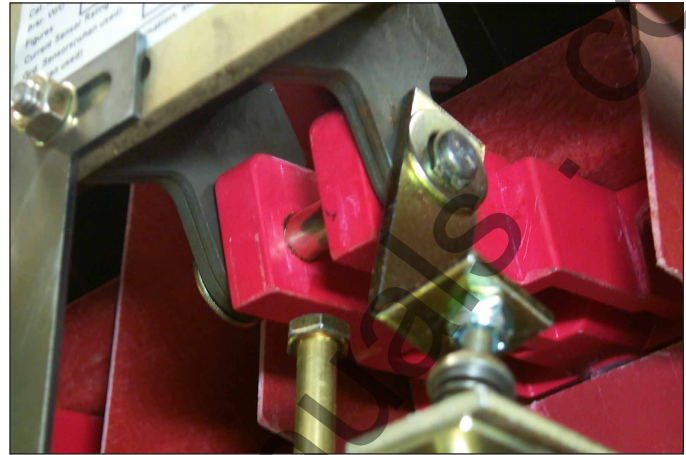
Reset Assembly Mounting on a LAF-1600 C Breaker.
